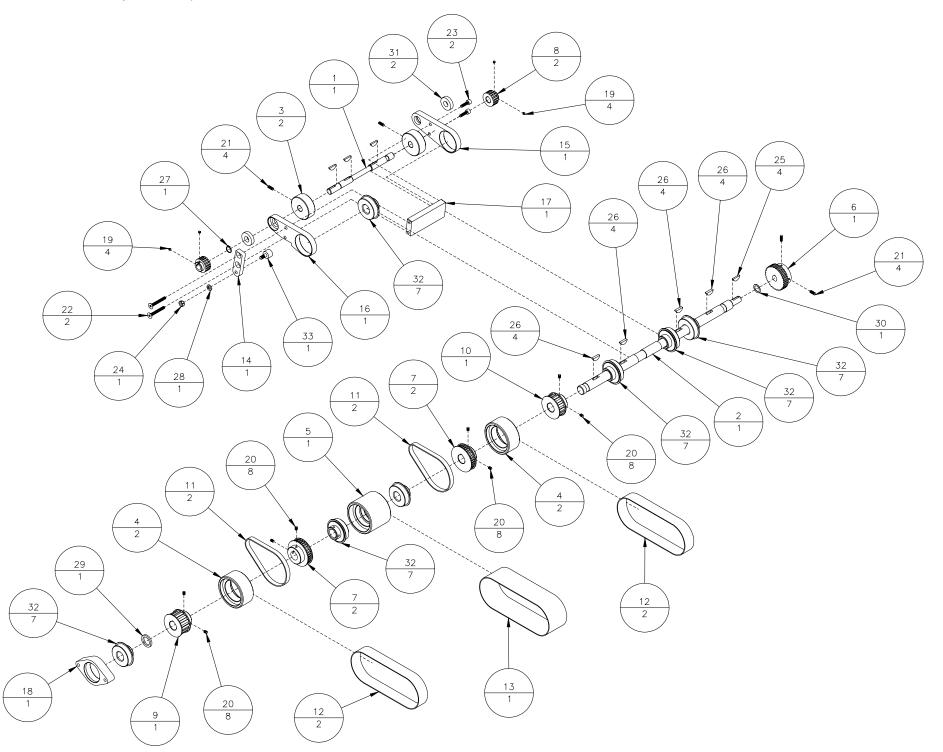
Table Belt Takeup Roller Assembly (106323A)
